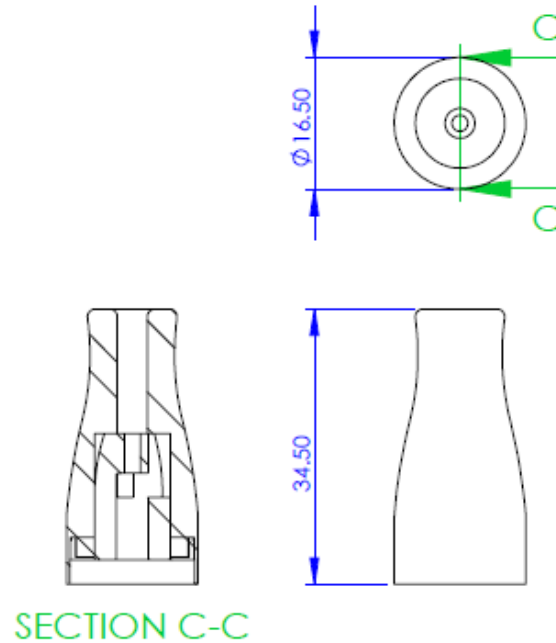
Diagram and dimensions of the Stella - Mouthpiece. All dimensions are in mm.
